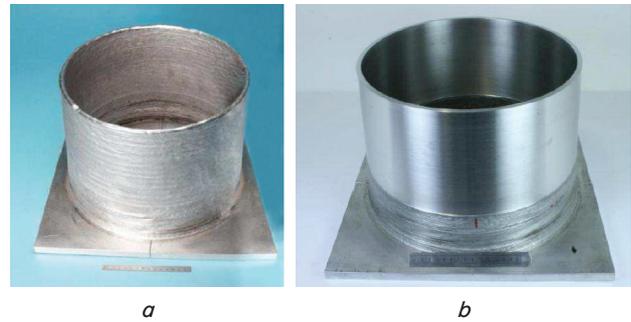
Manufacturing of satellites cylindrical parts with variable wall thickness, made of aluminum alloys using arc welding (time of the part manufacturing – 6 hours) [17]: *a* – after layer-by-layer building-up; *b* – after machining
